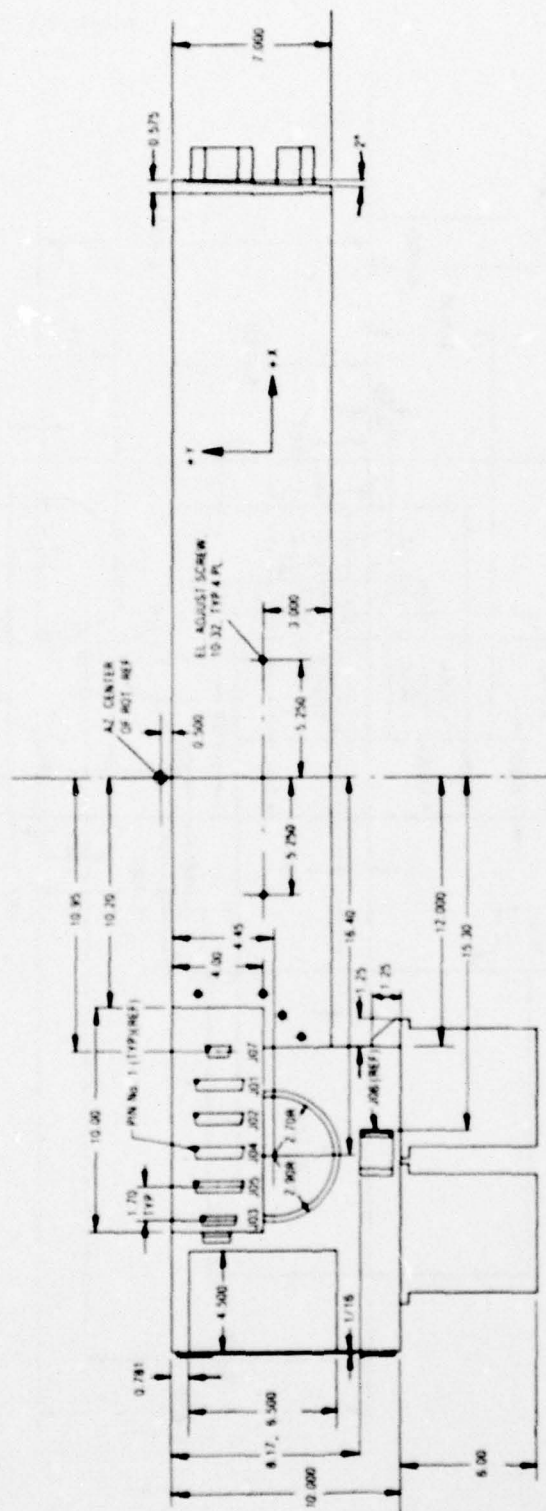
CRLS-229 Outline and Mounting Drawing, Part 2 of 3.
